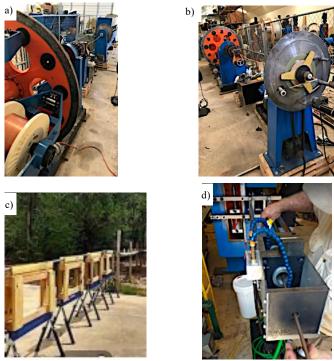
CIC manufacturing process at ATC: a) 24-spool stranding machine; b) SS foil over-wrap; c) pulling the long-length cable through the sheath turbe; d) drawing of sheath onto cable.
